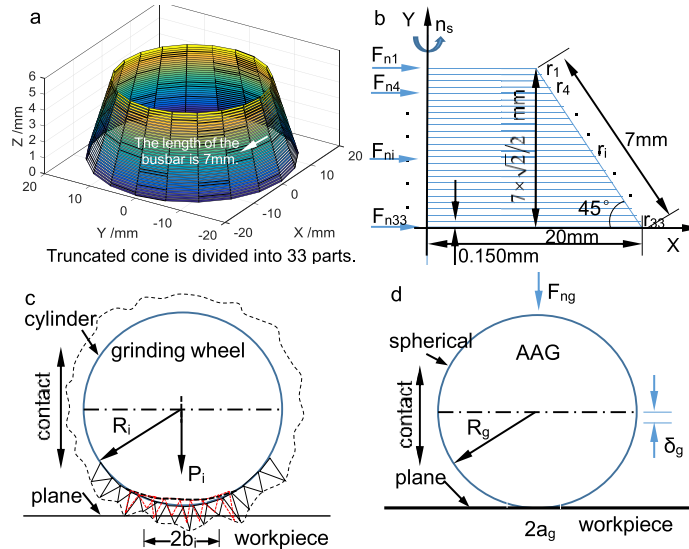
(a) Size of the shaped wheel in the raceway grinding region; (b) Force distribution; (c) Deflection within the wheel-workpiece contact zone; (d) Deflection within the AAG-workpiece contact zone.
